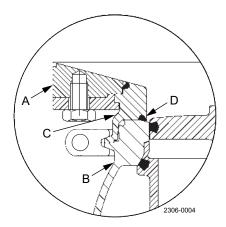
Converting from SMP-TO valve to Unique-TO valve in tank flange
